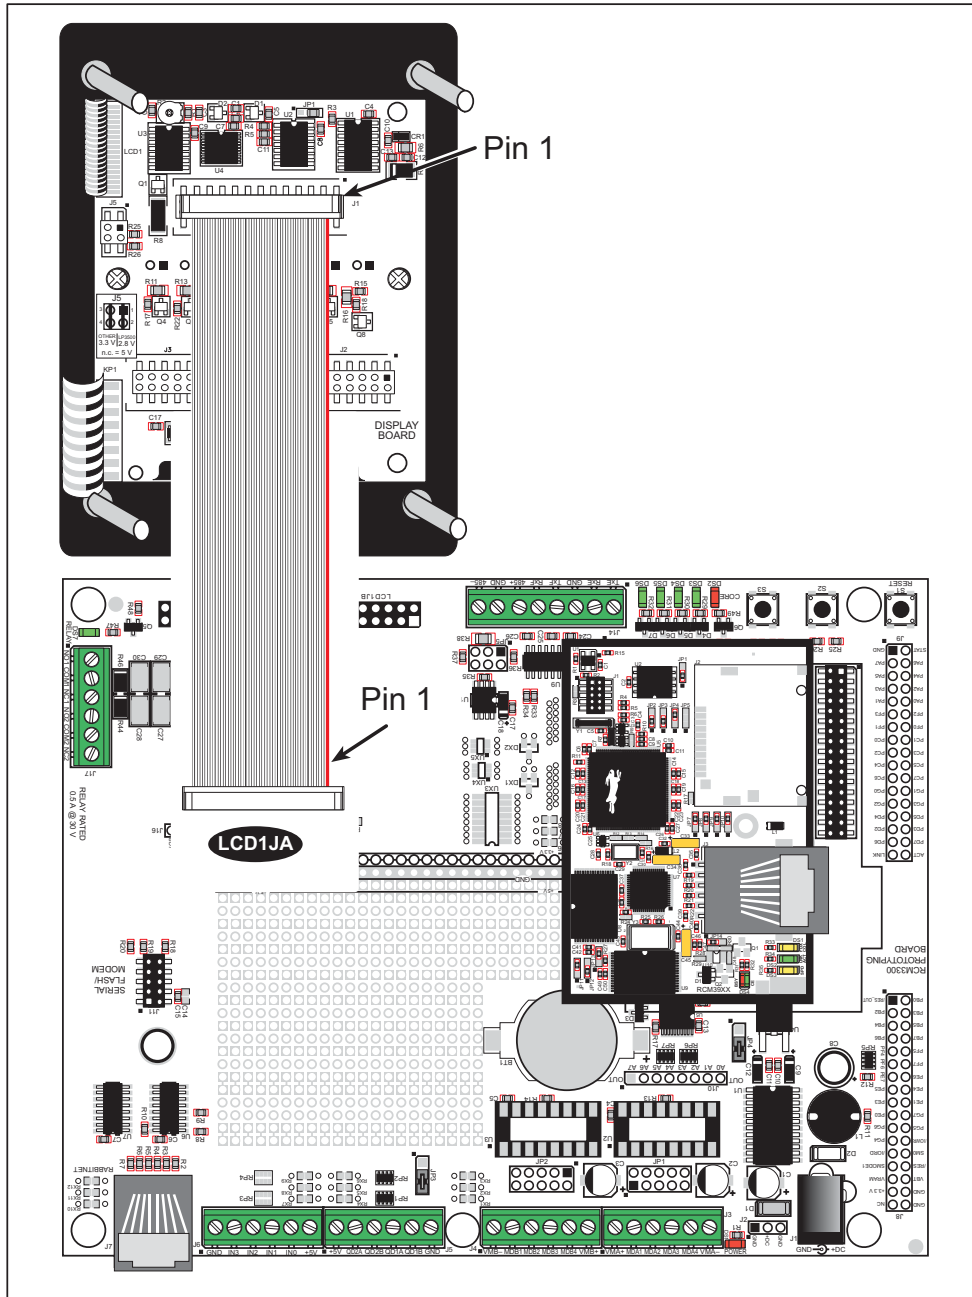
LCD/Keypad Module Mounted in Panel (rear view)
